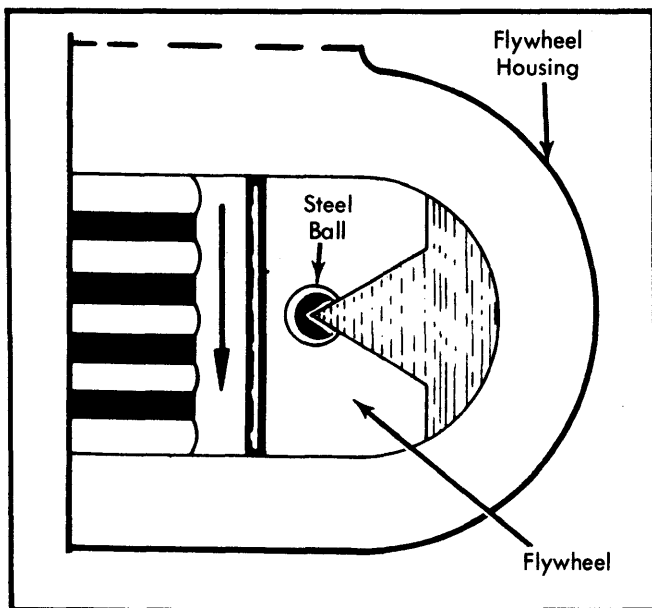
Ignition Timing Mark In Window of Flywheel Housing
